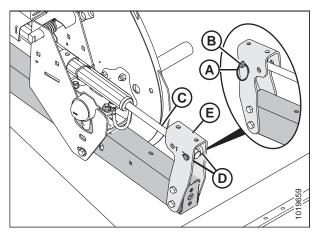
Right Reel Arm Cylinder in Forward Position
